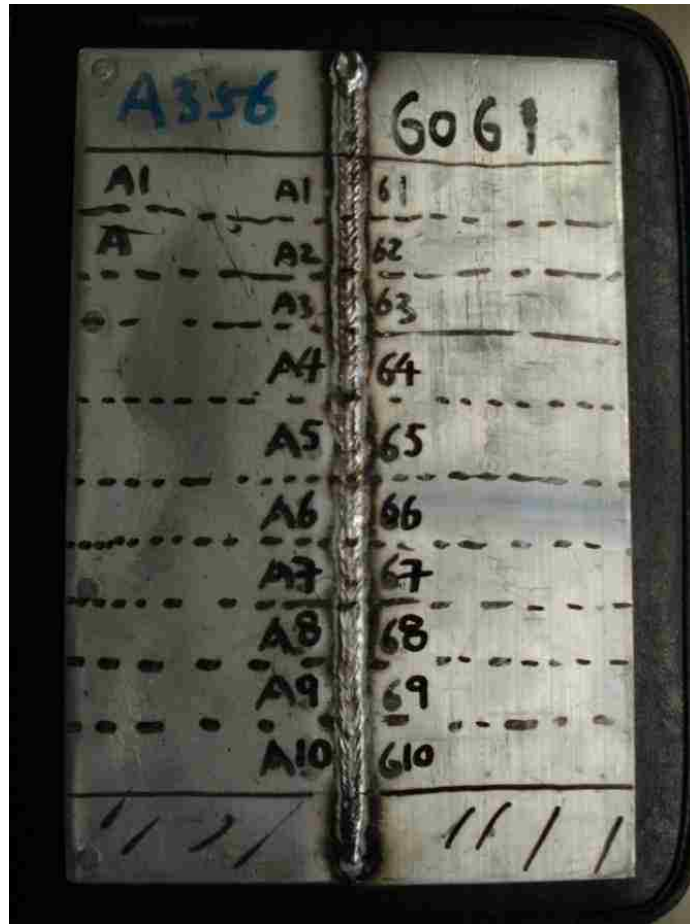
Representative welded pair of two plates of as-cast alloy A356 and Wrought Alloy 6061.
